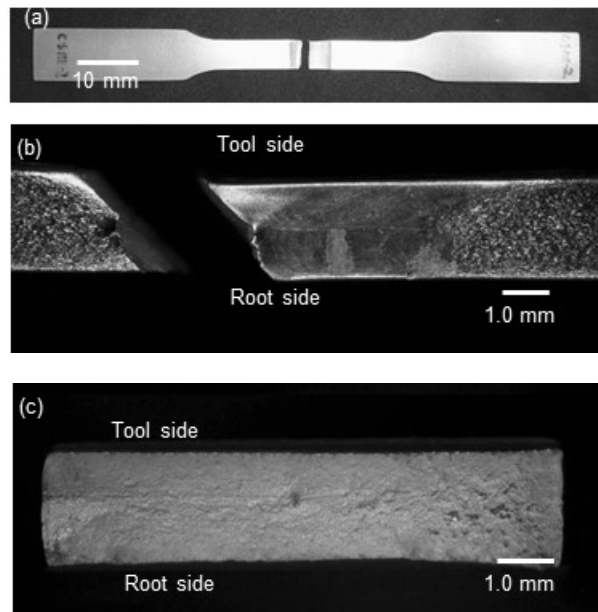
Fracture location and surface for weld B (a) top view, (b) side view, and (c) Fracture surface
